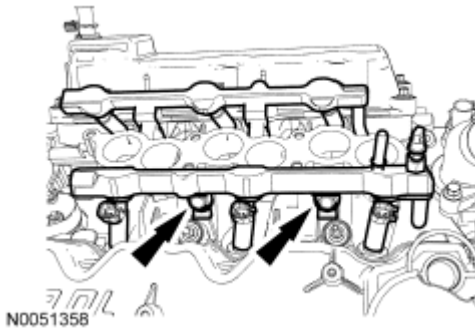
Locating Bolts, Fuel Rail & Fuel Injectors
